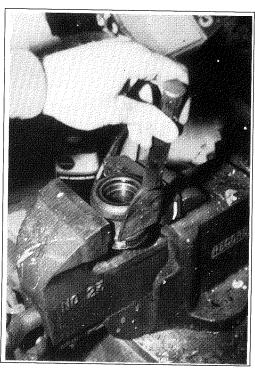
Unclip the clutch release mechanism from the bellhousing and separate off the clutch release bearing carrier. Support the bearing on top of the open jaws of a vice and knock off the carrier.
